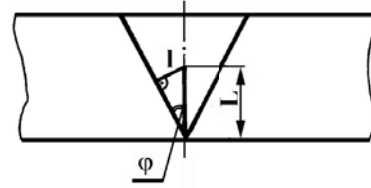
Geometrical demonstration of the weld cross-section
